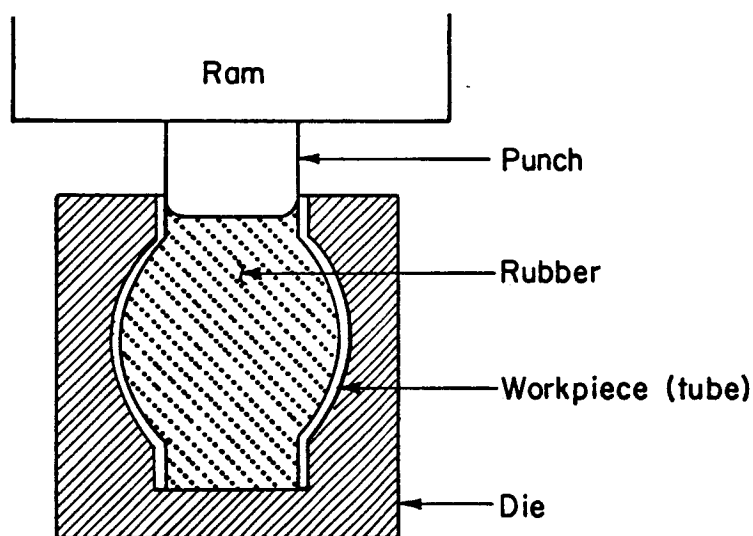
RUBBER-BULGING SETUP (REF. 25)
